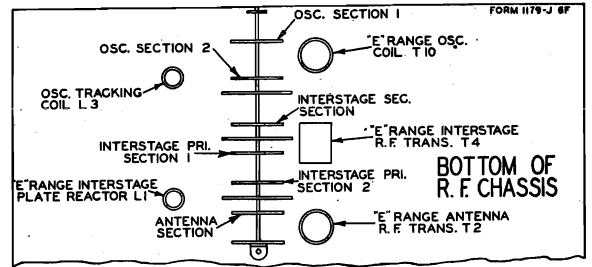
Bottom View of Chassis Showing Coil and Switch Section Location
